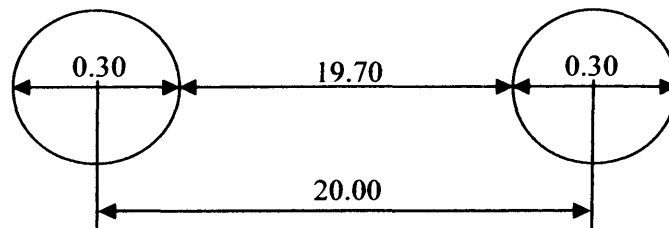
Dimensions of the holes drilled in the specimen (not in scale)
